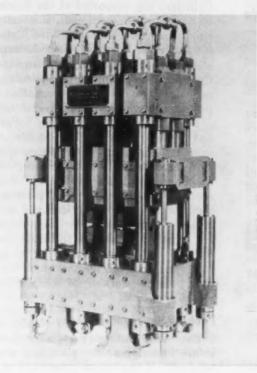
Model of 35,000-ton hydraulic forging press designed by United Engineering & Foundry Co., Pittsburgh.
